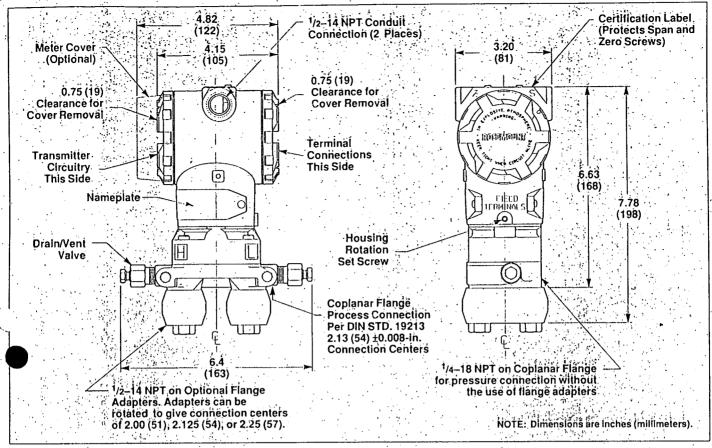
Model 3051C Differential Pressure Transmitter Dimensional Drawing
